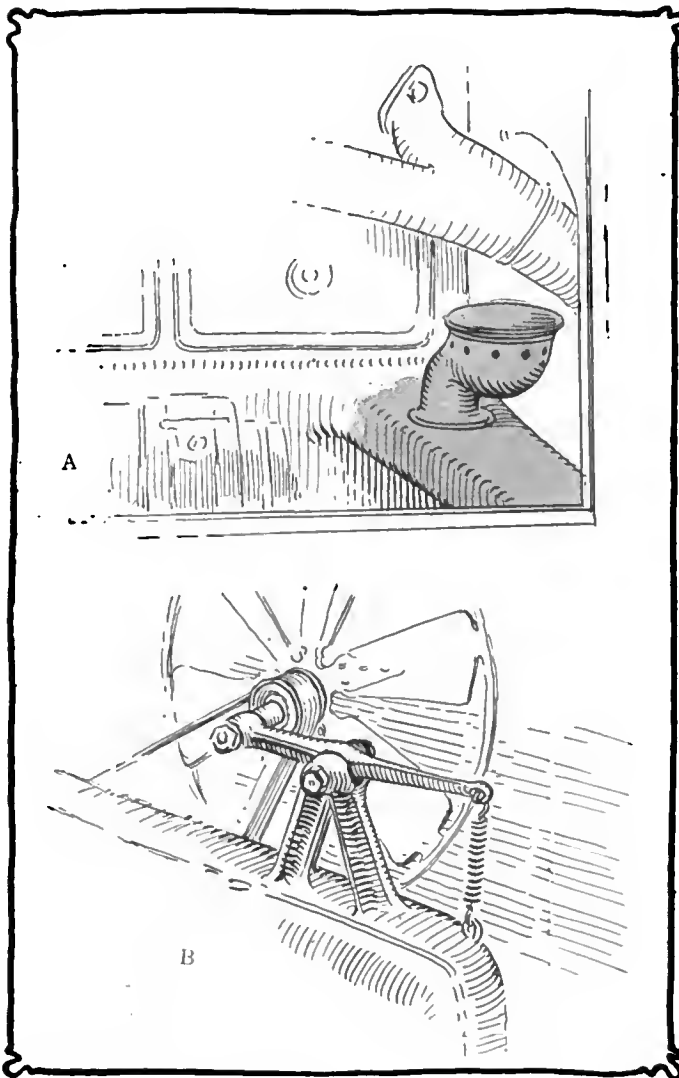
A, Oil filler on S.G.V. cars; B, Spring tension on Velle fan belt
